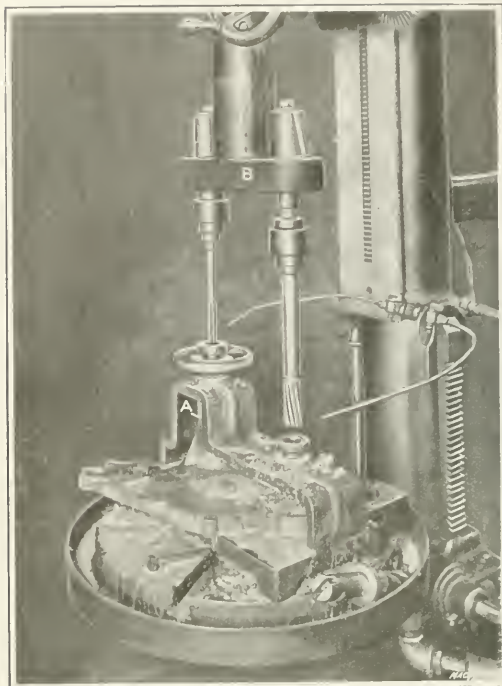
Cincinnati 24-inch Upright Drill equipped with Sellw Two-spindle Drill Head, Ward Quick-change Chucks and Tools for boring and reaming Starter-crank Shaft and Magneto Shaft Bearings in Timing Gear-case Covers
